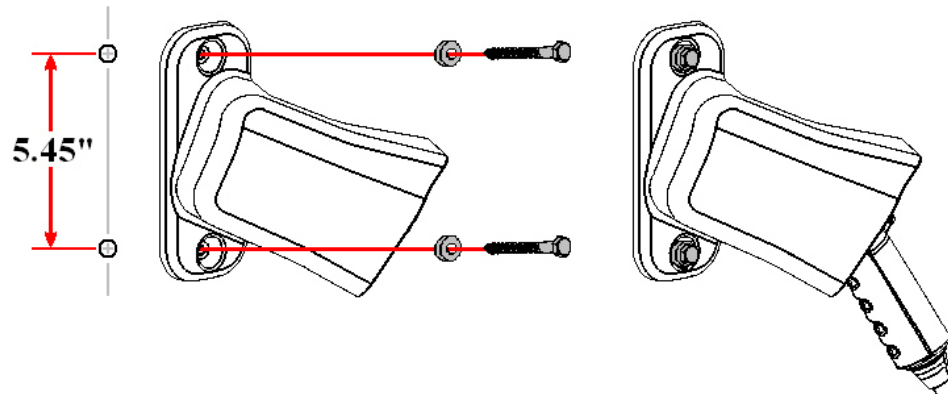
Mounting the SAE J1772 connector holster using the exterior wood screws and washers
